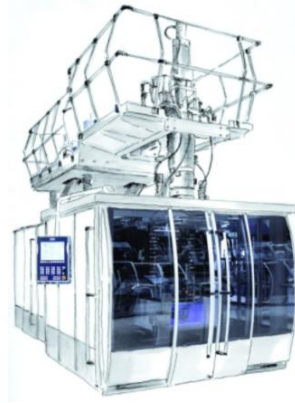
BBM Maschinenbau, Blow Moulding Machine.
